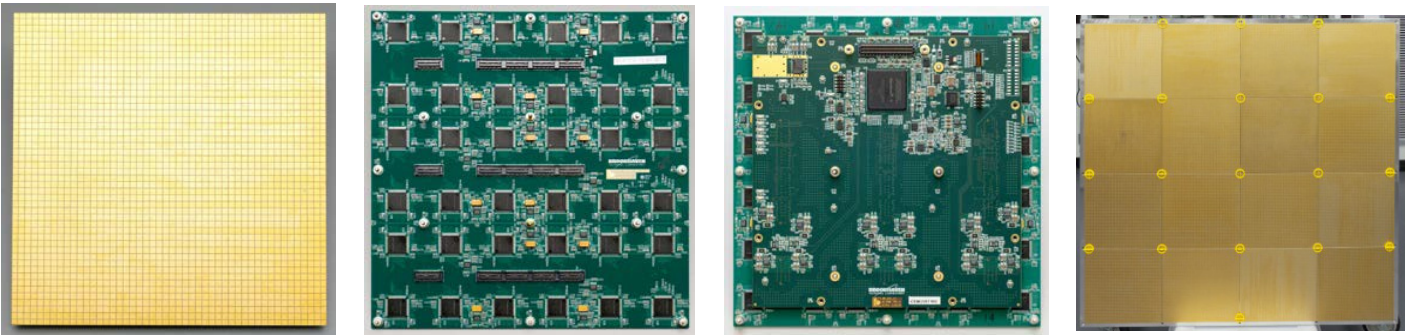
Left: the front of the anode pad board, showing an array of 48×48 pads. Middle left: the back of the pad board, showing an array of 6×6 ASICs, each connecting to 8×8 pads on the front. Middle right: The readout board (IMPROC) with an Altera Cyclone V FPGA is plugged into the pad board. Right: 16 pad boards installed on a mounting frame forming the 1m×1m active area.
